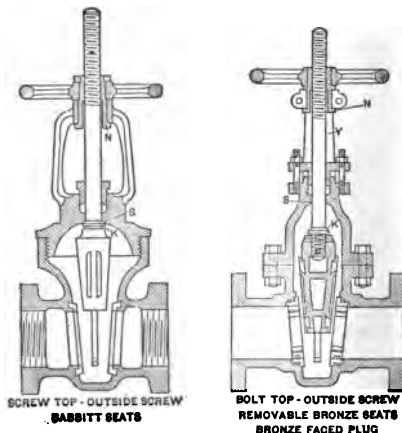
Screw Top, Outside Screw, Babbitt Seats; Bolt Top Outside Screw, Removable Bronze Seats, Bronze Faced Plug.
